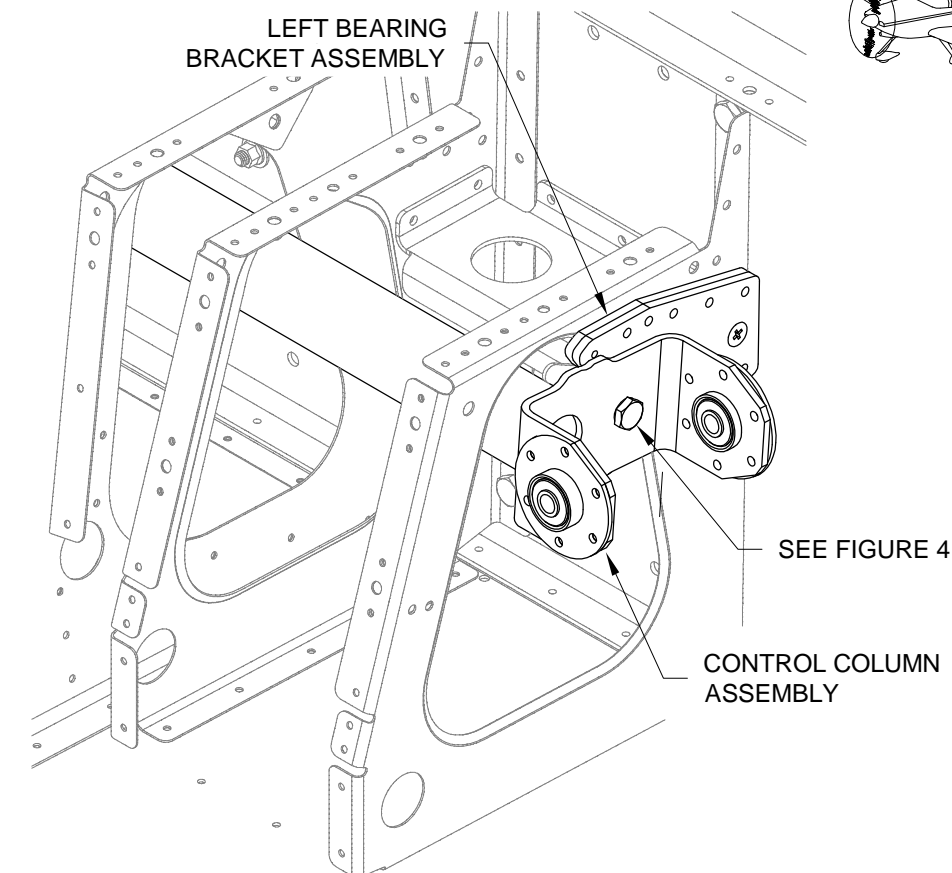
CONTROL COLUMN ASSEMBLY INSTALLATION
